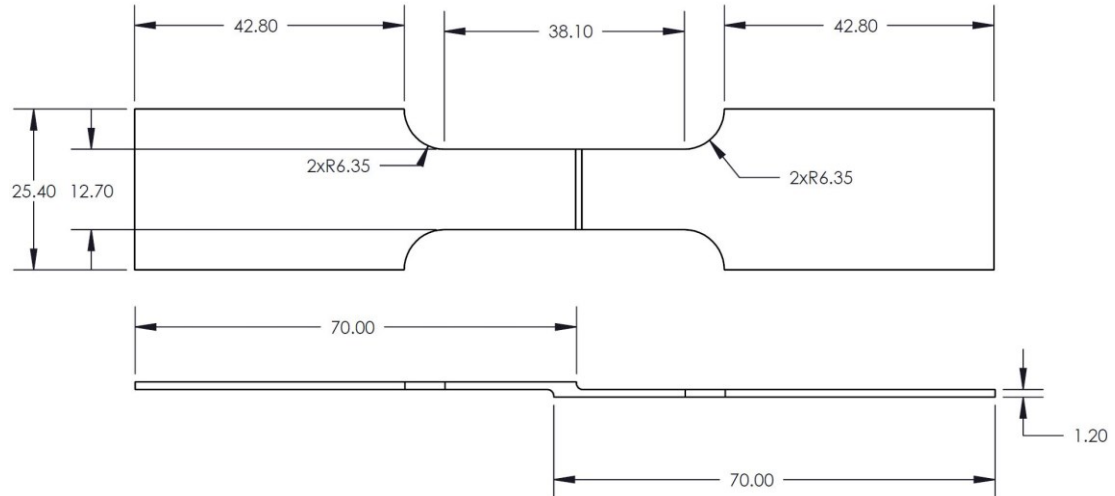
Dimensioned drawing of IN625 single lap joint specimen. Filler metal BNi-2 or Ni30. Specimen cut by wire EDM.
